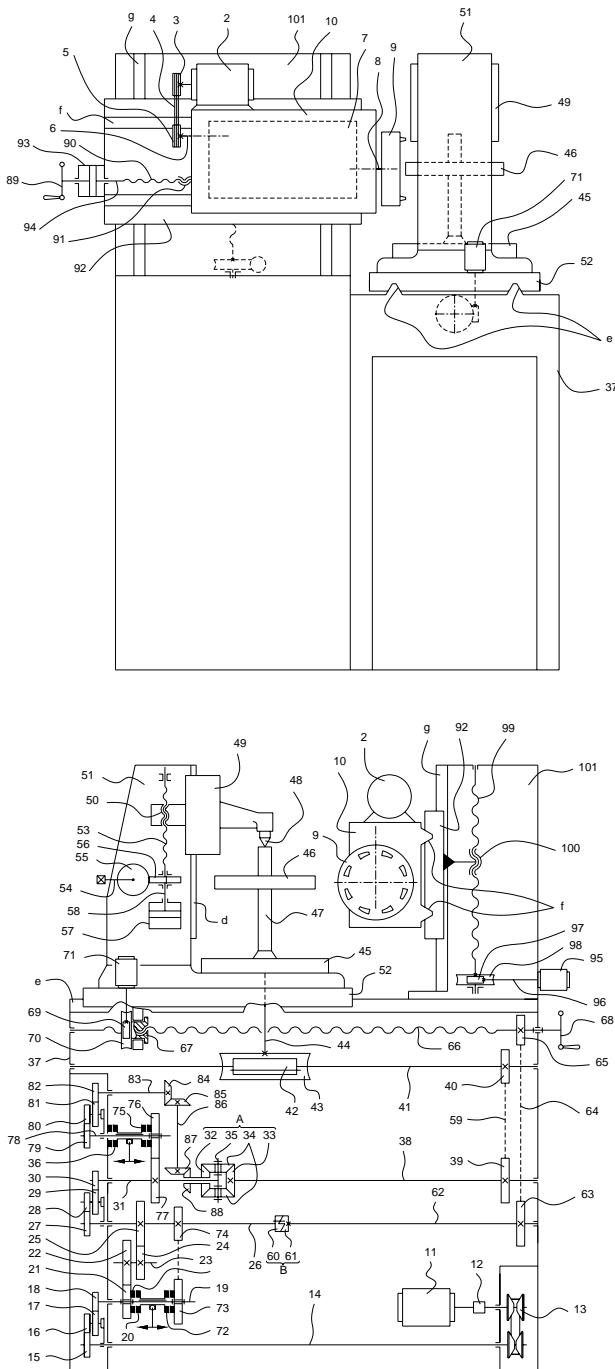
Kinematic diagram of a machine for milling by rolling of circular directrix spur gears [11].
